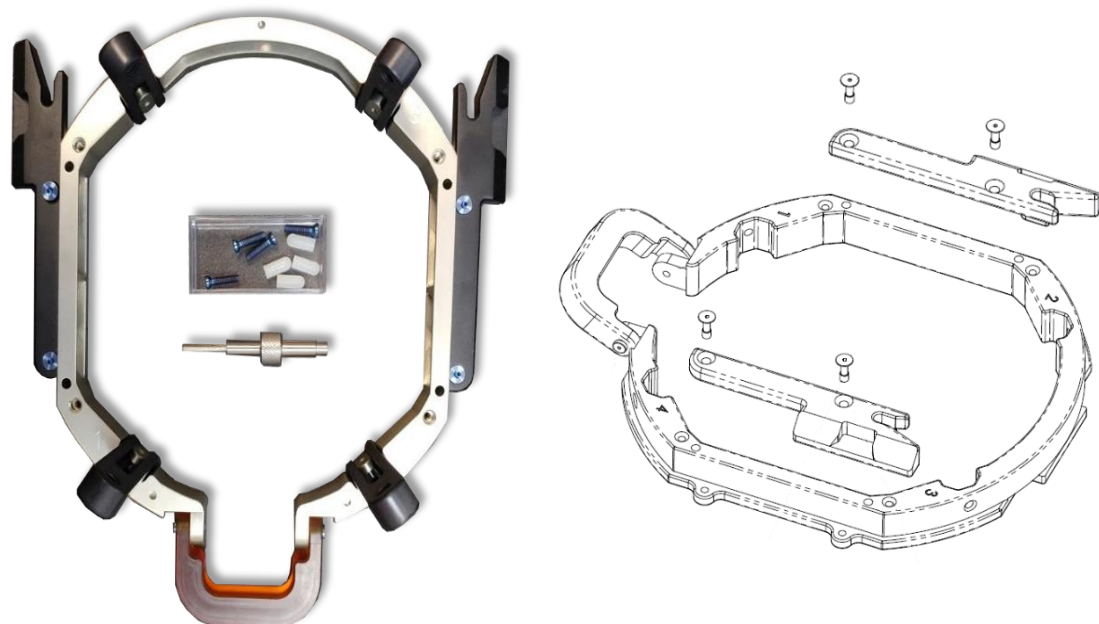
13: Connecting Side Holders to the Headframe (for illustration purposes only)
